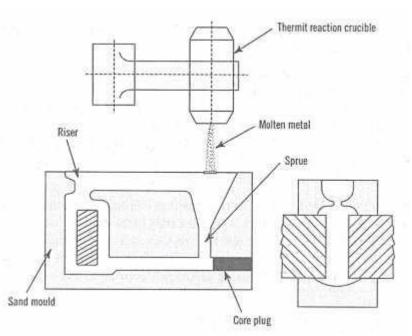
Arrangement of thermit welding for casting repair
